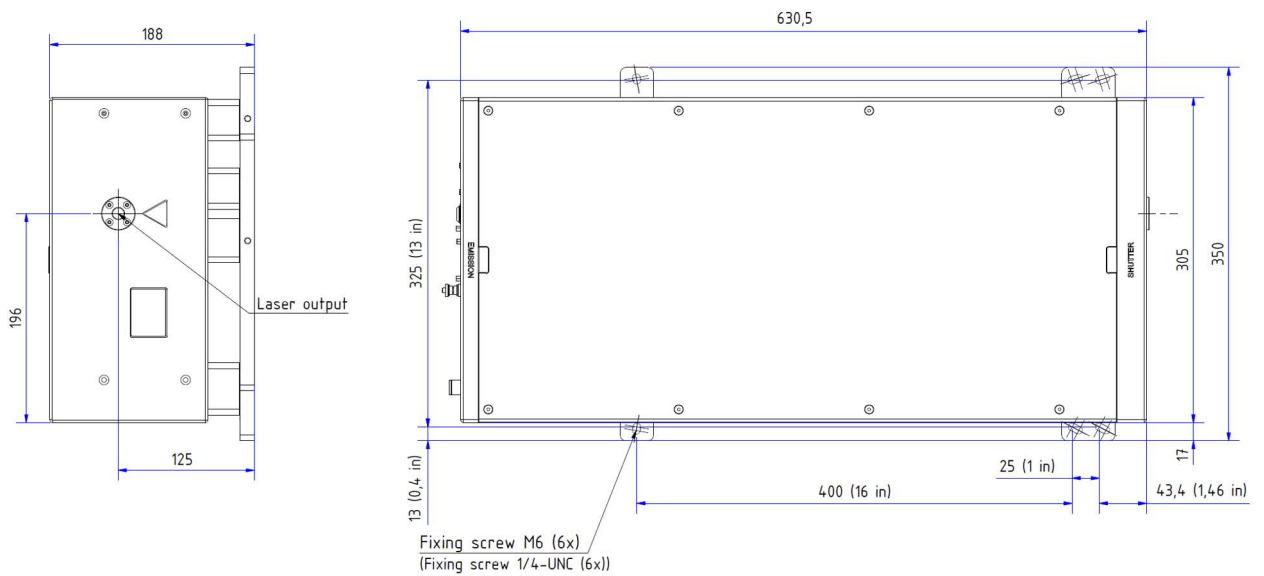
Dimensions of a CARBIDE laser, modified to accommodate an optical parametric amplifier
